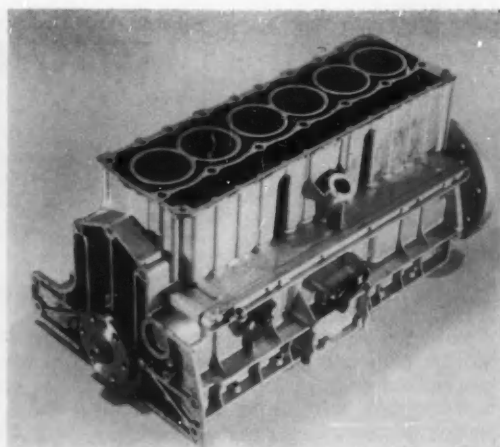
RAMBLER'S aluminum engine design has "free-standing" bores and a cylinder block without a continuous top deck.
